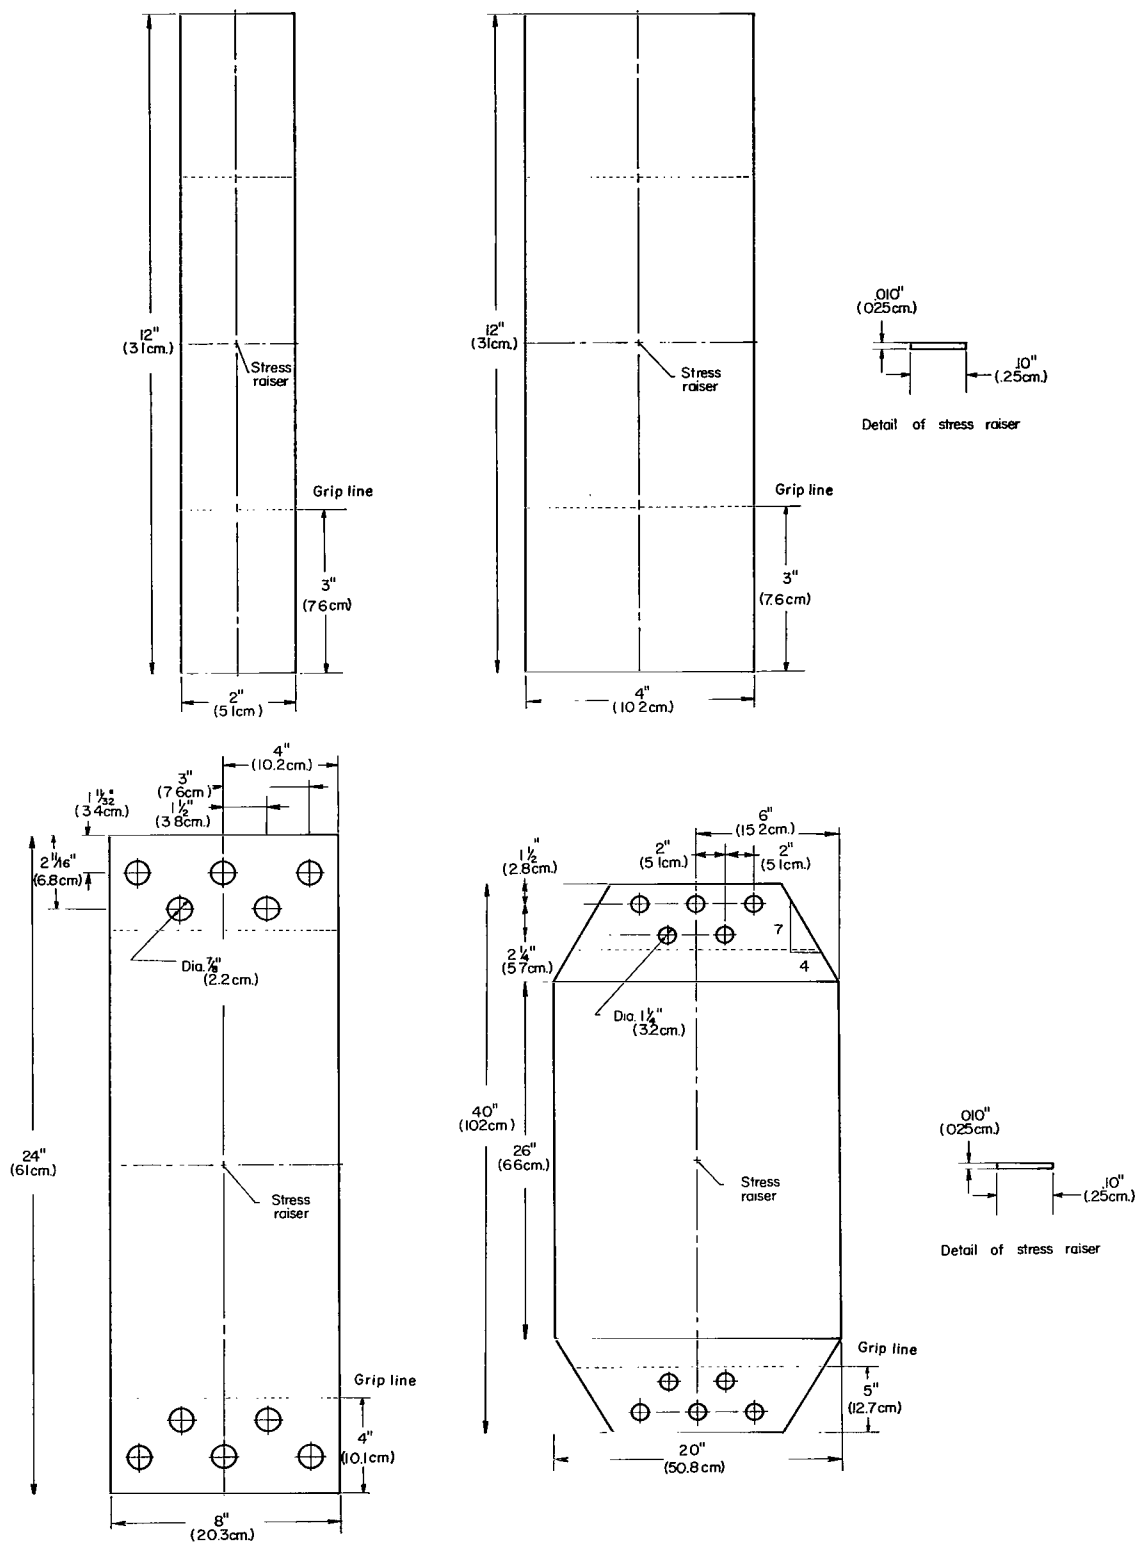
Specimen configurations. Specimen thickness, 0.050 inch (1.27 mm).
